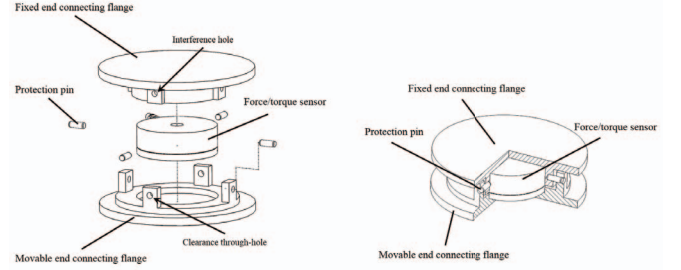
An overload protection device. Left: exploded view. Right: assembly diagram.
